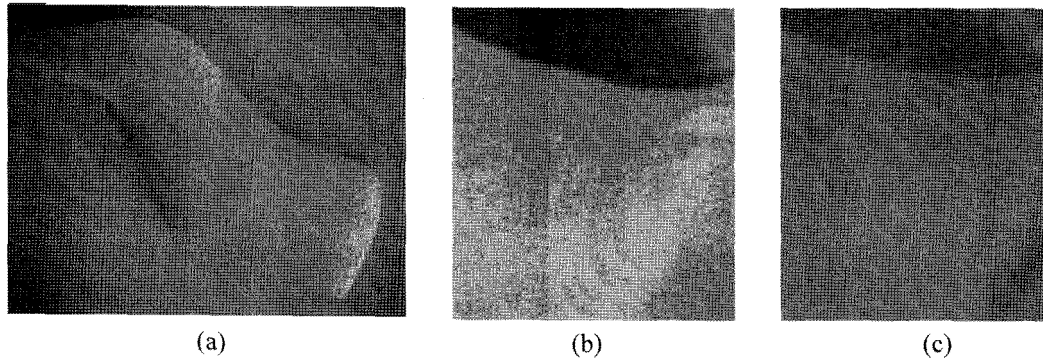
Machined shoe: (a) Constant grid sizes based planning (b) Enlarged view of machining flaw and (c) Adaptive cutter path planning.
